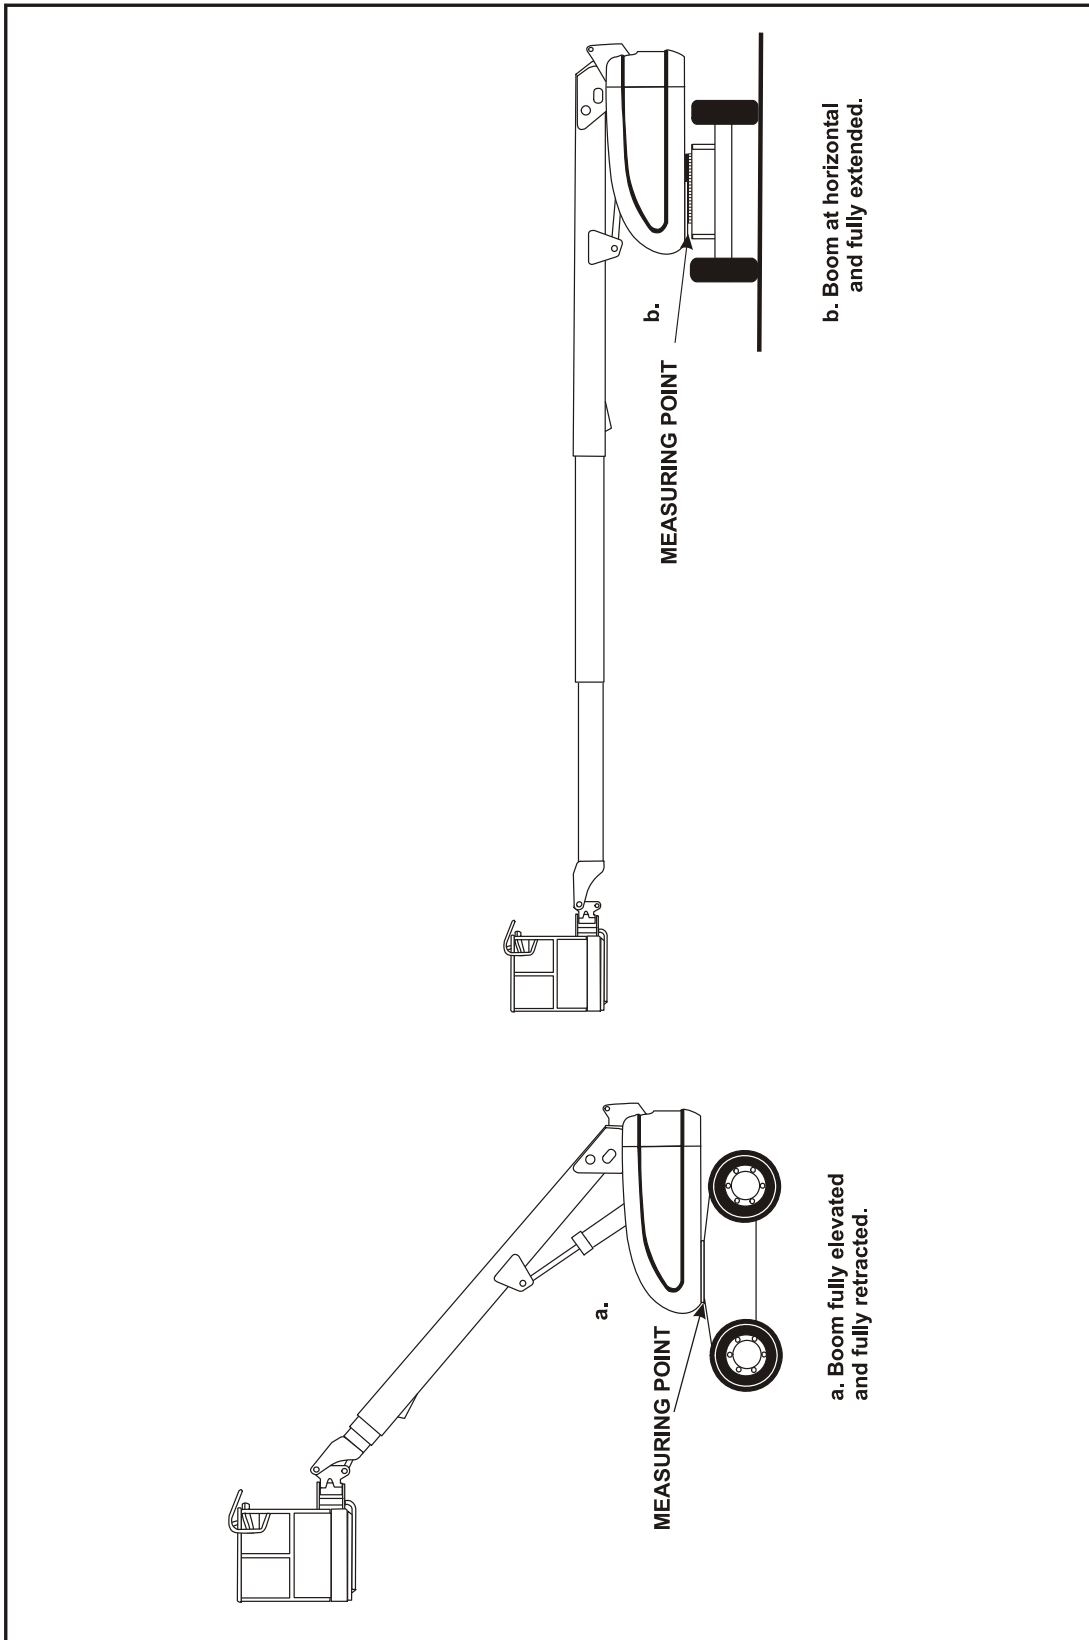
Swing Bearing Tolerance Boom Placement
